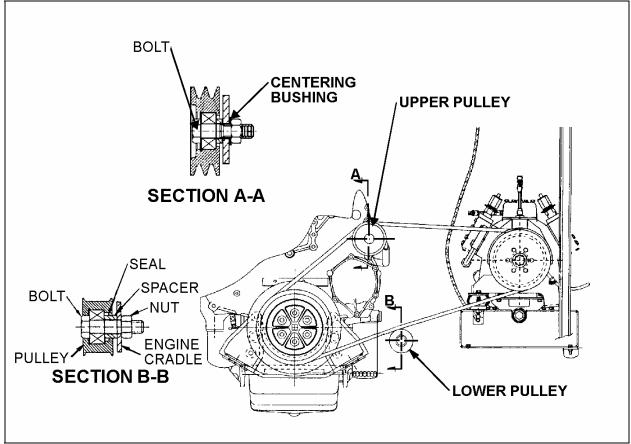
A/C COMPRESSOR DRIVE INSTALLATION
